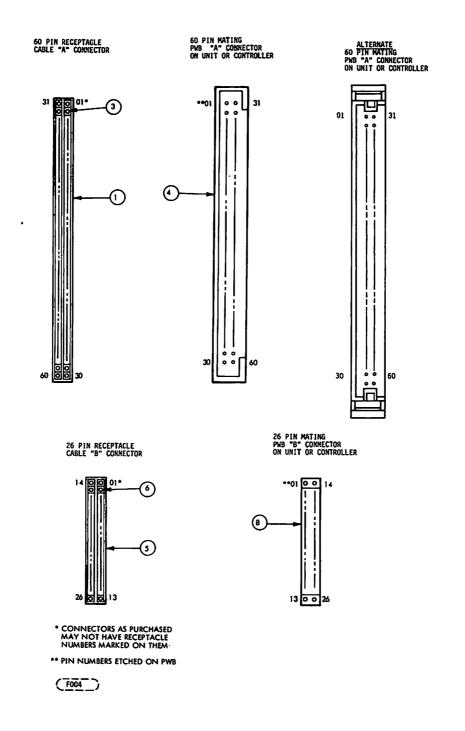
I/O CONNECTORS - CABLE MOUNT AND PWB MOUNT
